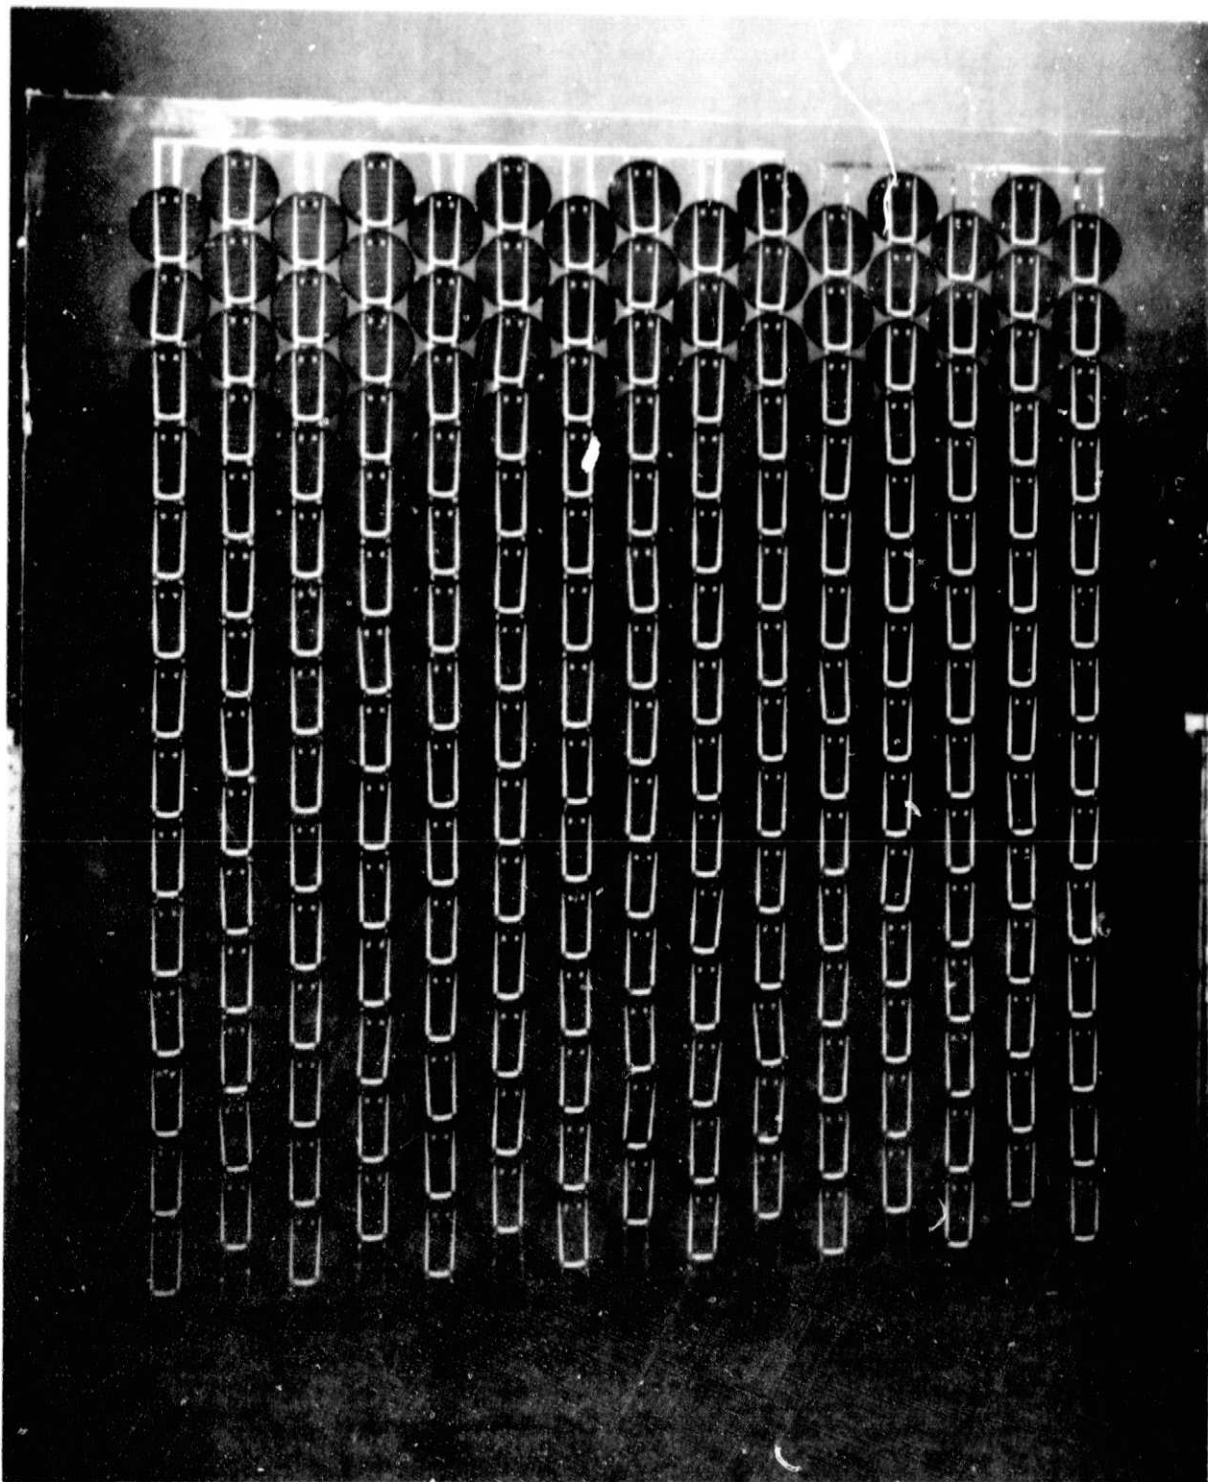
Front view of first 4-ft² panel. Premature edge seal caused trapped air inside panel. Starburst fracture at lower center of panel (both sides) may be due to thermal strain.
